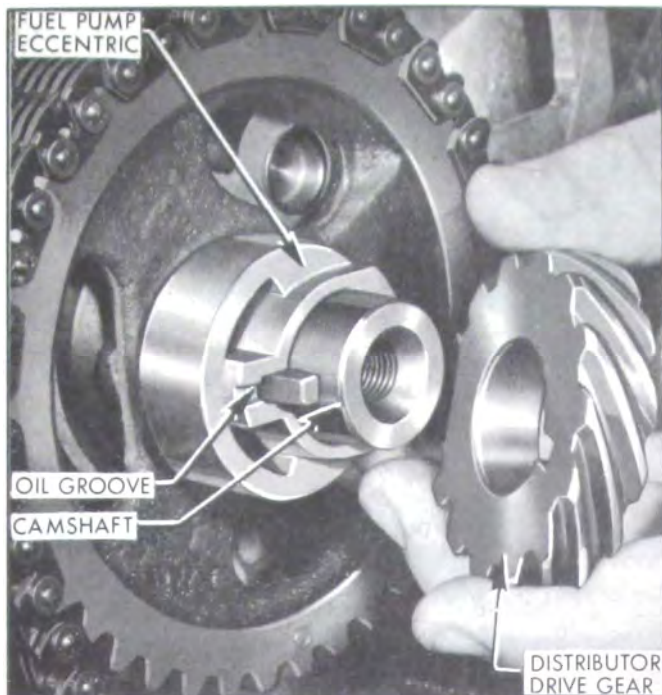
Fuel Pump Eccentric and Distributor Drive Gear Installation
